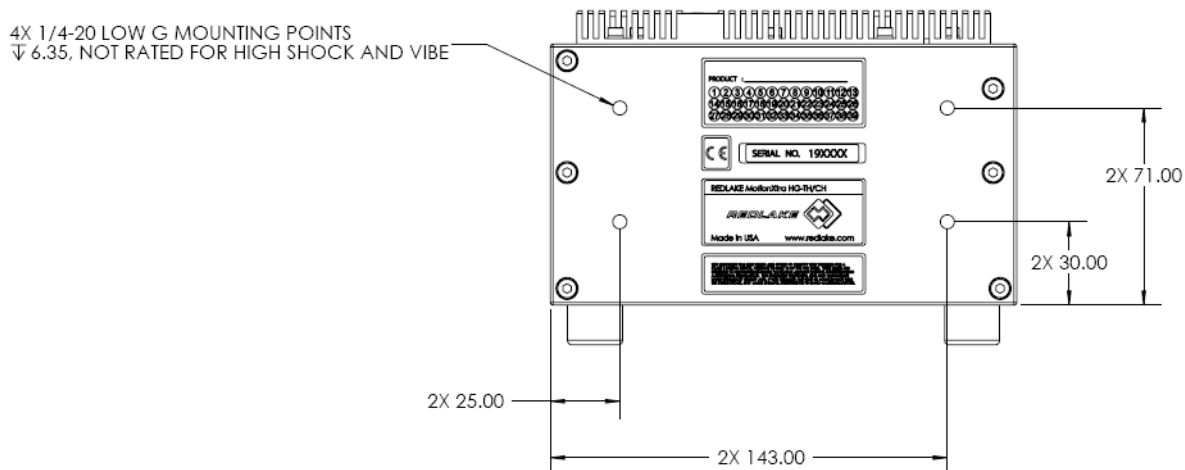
HG-TH Controller mounting holes, rear (in mm)
